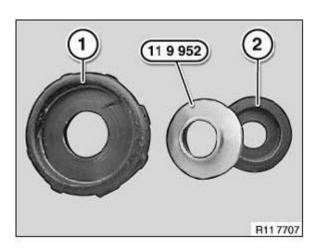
Identifying Valve Cage And Special Tool (11 5 952) Courtesy of BMW OF NORTH AMERICA, INC.
